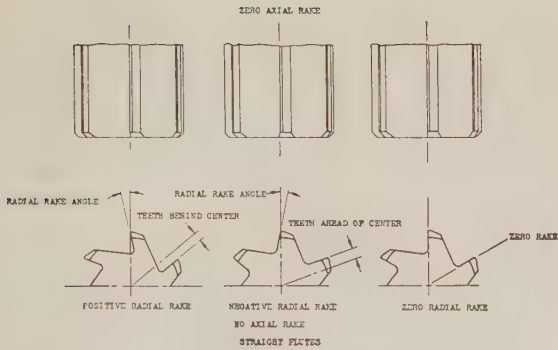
TYPES OF RADIAL AND AXIAL RAKE
